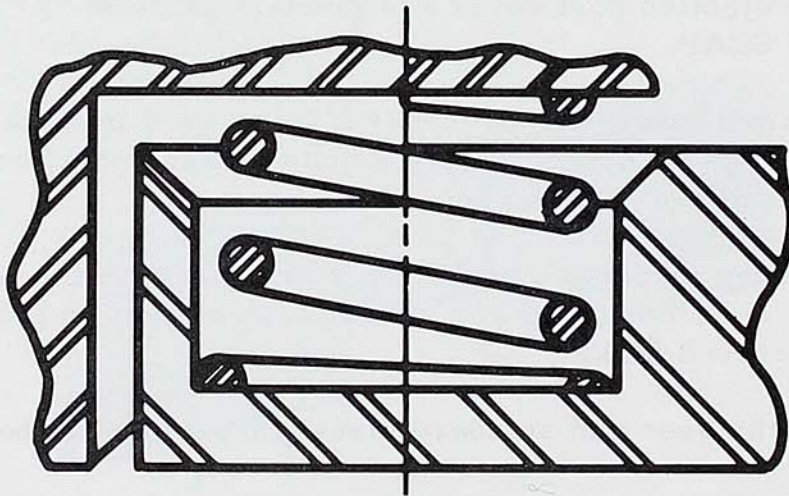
Bolt Assembly - Seating of Extractor Spring in Extractor.
